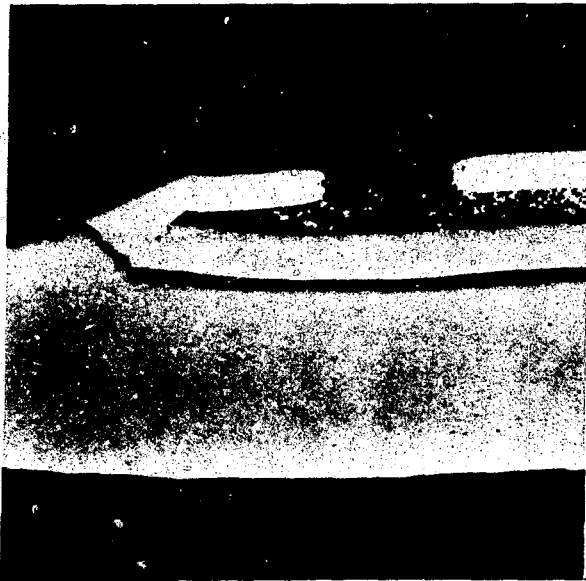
A small crack was observed in the SRP-423 vent assembly weld. As polished, 40X.
